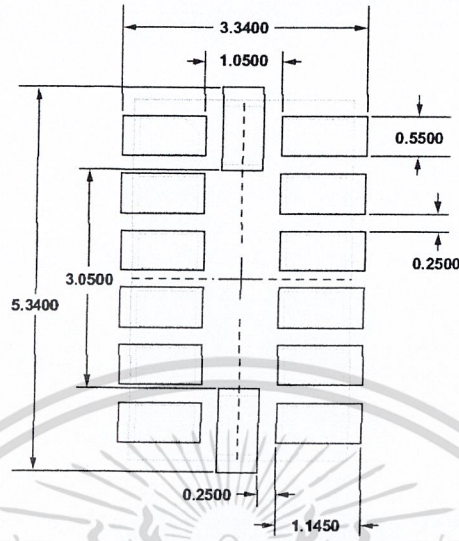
Recommended Printed Wiring Board Land Pattern (Dimensions shown in millimeters)
